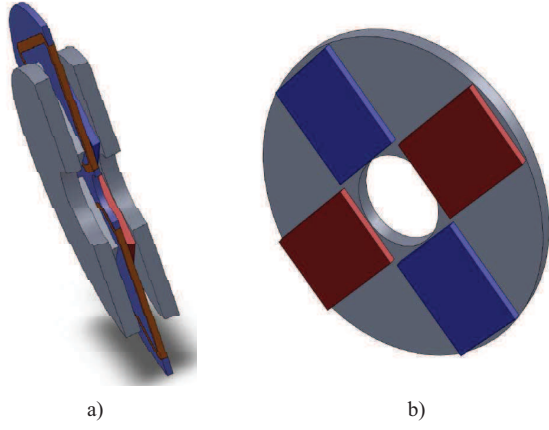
a) Cutted view of the complete machine and b) a view of the rotor.
